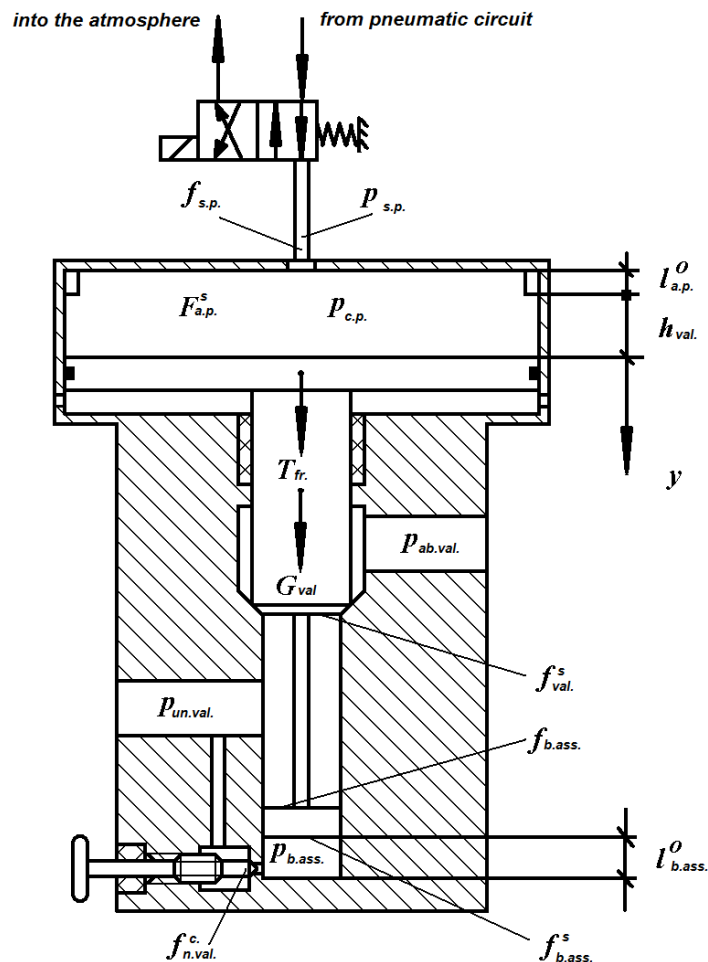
Design scheme locking saddle hydraulic valve with air-powered drive and hydraulic braking
